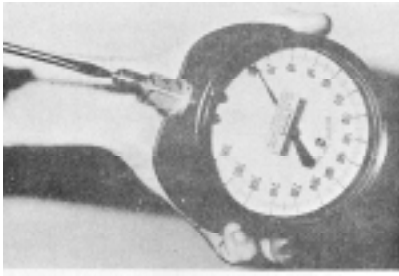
, F60181. Removing snubber from gauge stem
